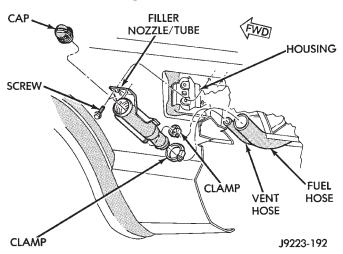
Fuel Filler Nozzle/Tube—XJ Vehicles
